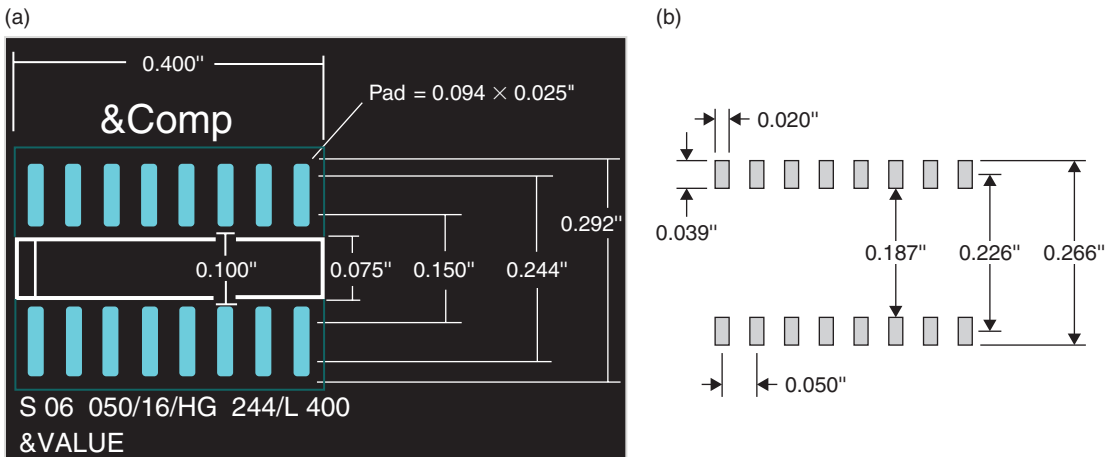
PCB footprints for the 16-pin SOIC package. (a) Layout footprint from *SOG.LLB*. (b) OEM-suggested land pattern.
